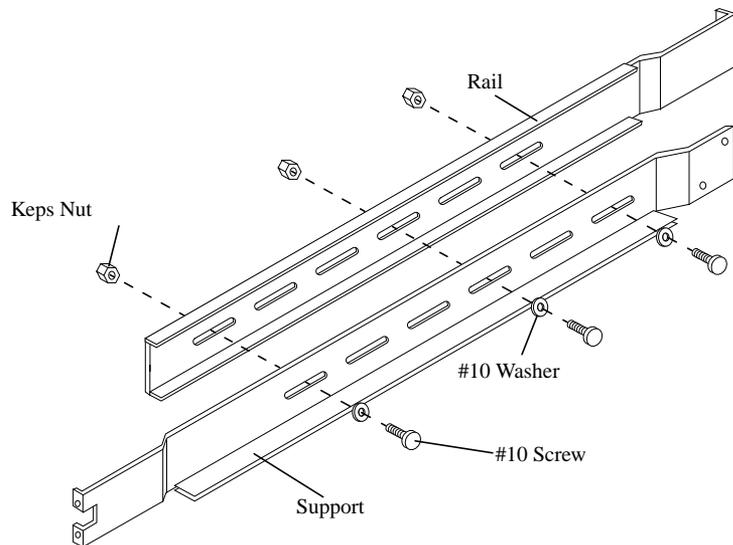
Assembling Rail to Support (Left Hand Assembly)
